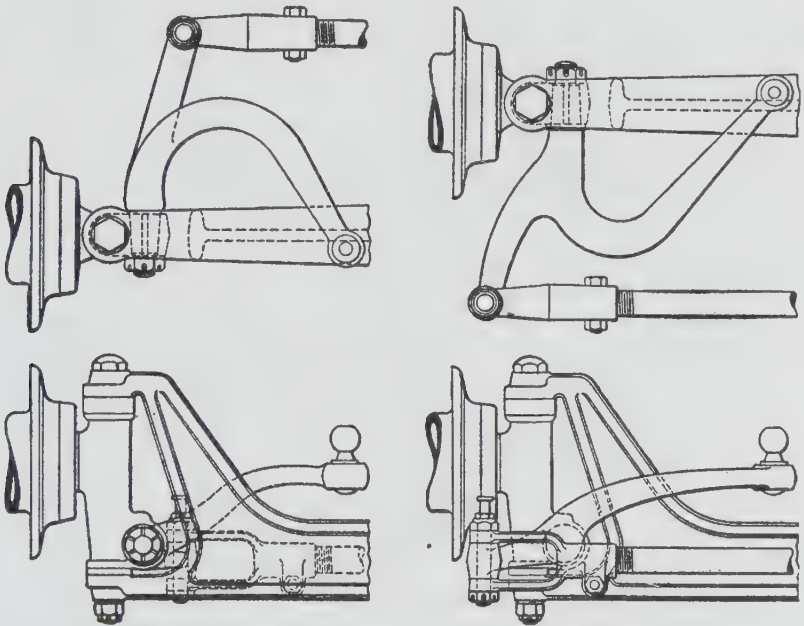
DOUBLE STEERING ARMS FOR ELLIOTT TYPE FRONT AXLE.
